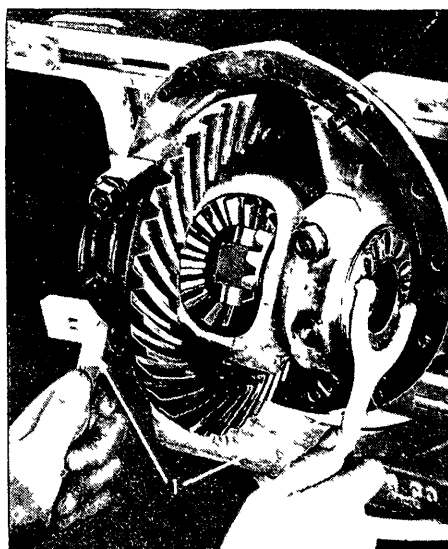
Adjusting differential bearings on units having adjusting nuts
